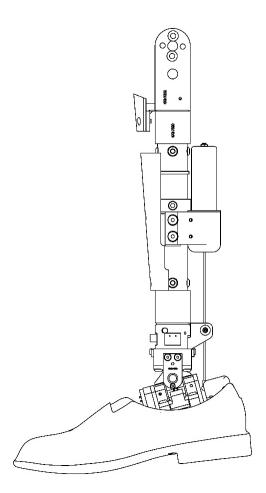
Lower extremity assembly (depicted without leg flesh)
